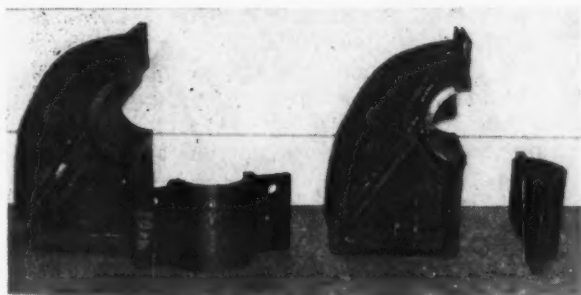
All-welded bearing housing which is welded directly to the frame. The use of bolts, nuts and studs has been entirely eliminated.
